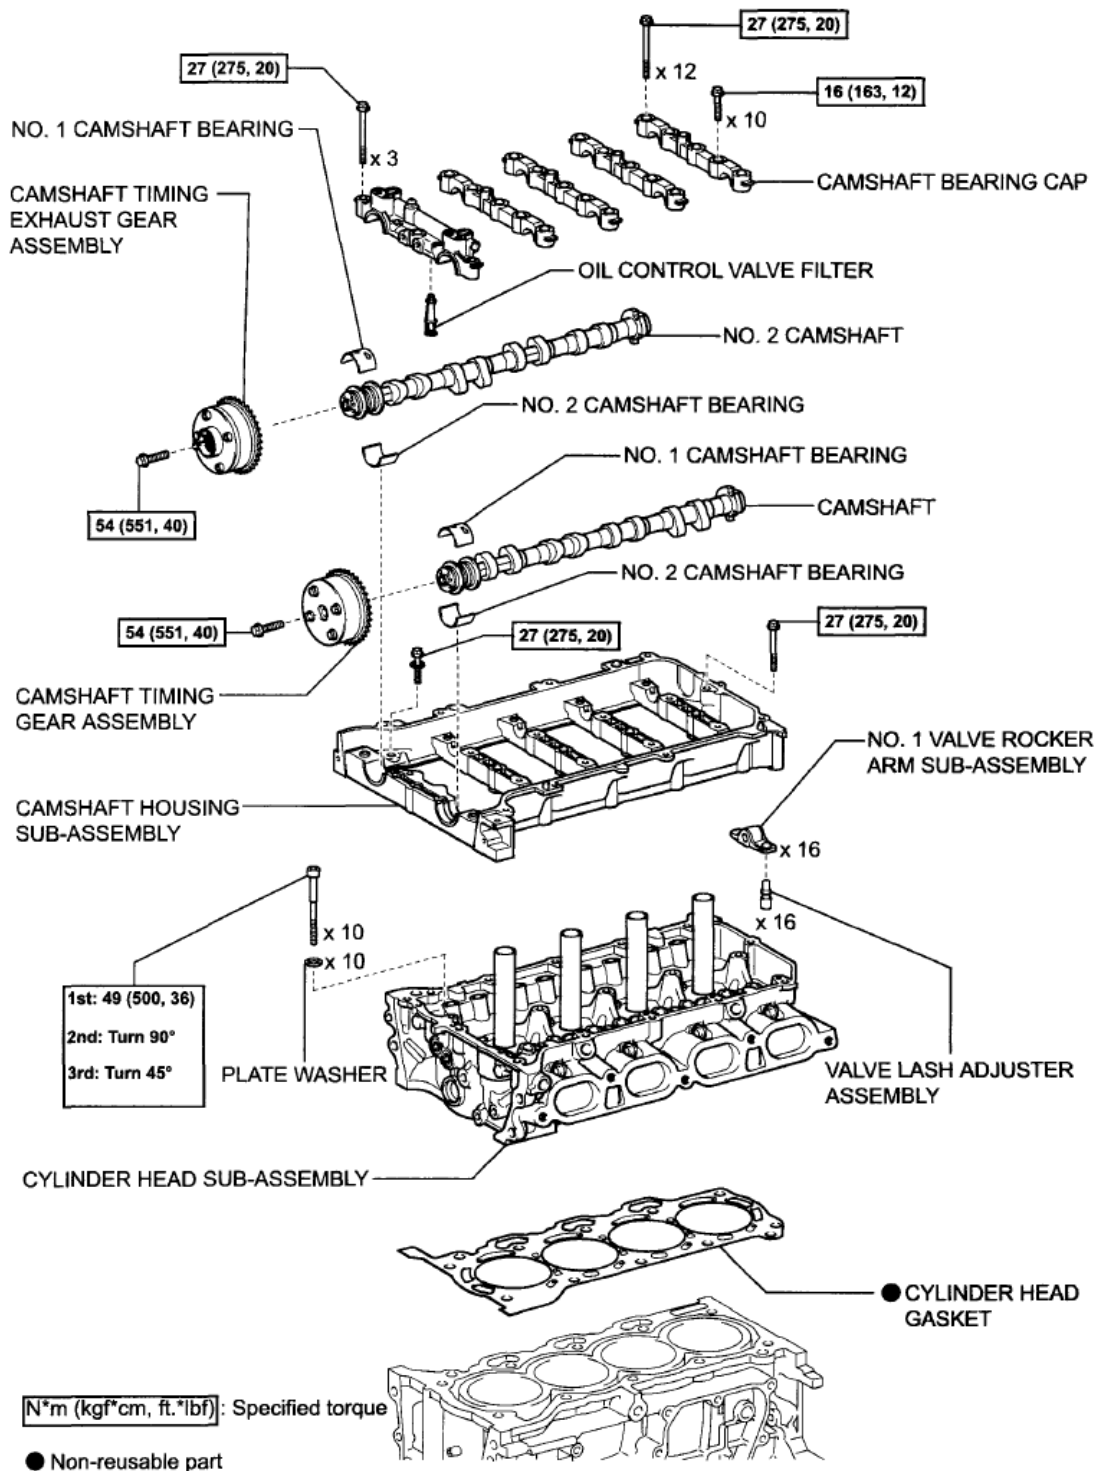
Identifying Engine Unit Components With Torque Specifications (6 Of 7)
